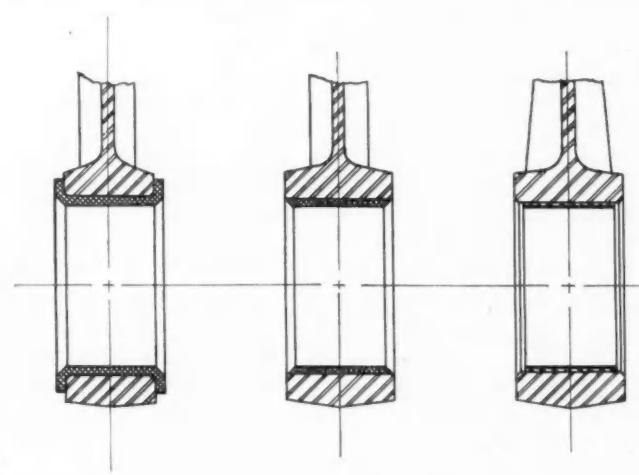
Three Types of Connecting-Rod Bearings Have Been Used in This Engine
